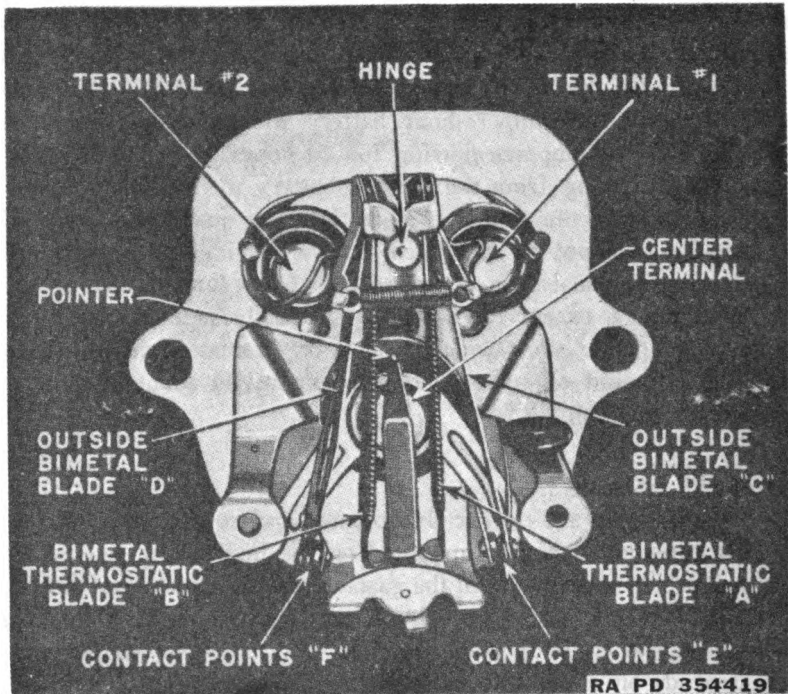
Instrument Panel Indicating Unit of Bi-metal Thermostatic Fuel Gage (Dial Removed).
